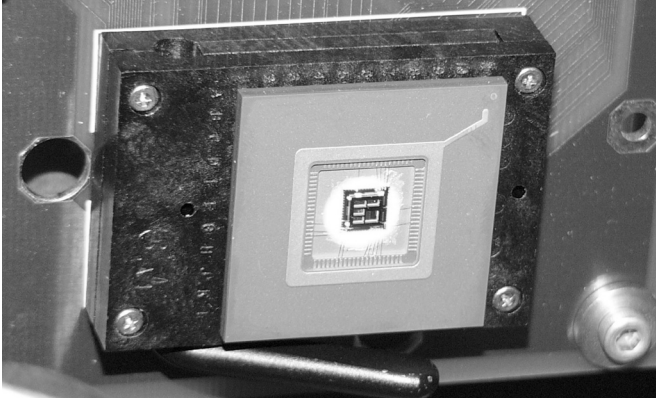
Assembled and packaged device mounted on a custom PCB.
